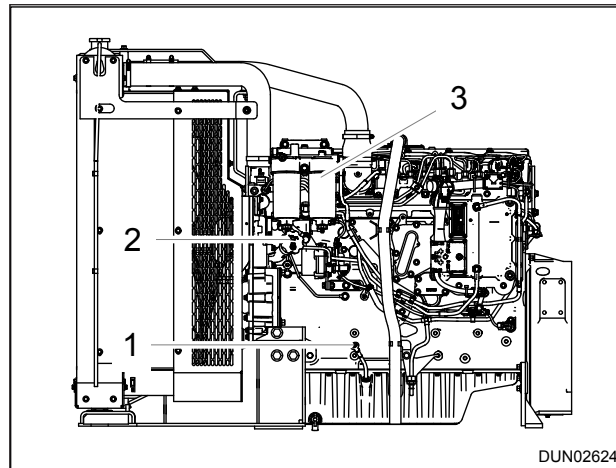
Engine Oil Filler Cap & Dipstick
